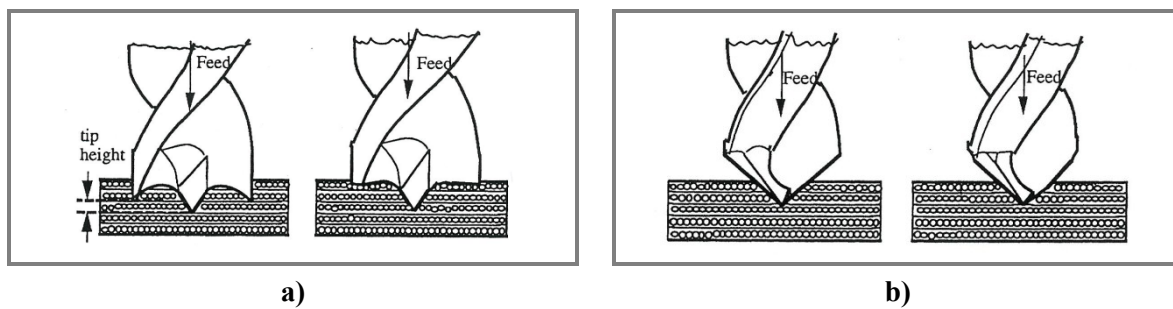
Effects of tool wear on tool geometry: a) multifaceted drill; b) twist drill [25, 90]
